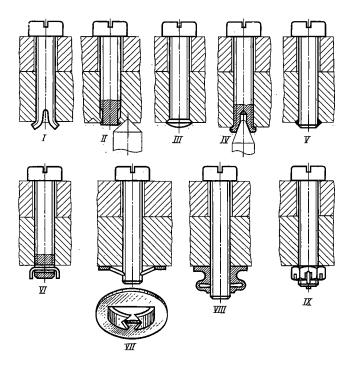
Locking machine screws at threaded shank I—by clinchingsplit end; II—by notching metal round shank end; III—by peening shank end; IV—by staking shank end; V—by welding (brazing) shank end; VI—by cotter pin; VIII—by pronged spring nut; VIII—by spring nut; IX—by castle nut with cotter pin
